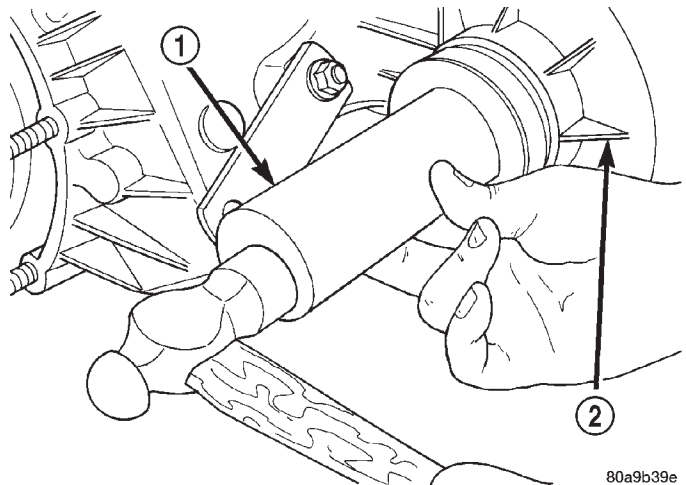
Remove Front Output Shaft Seal - Typical
